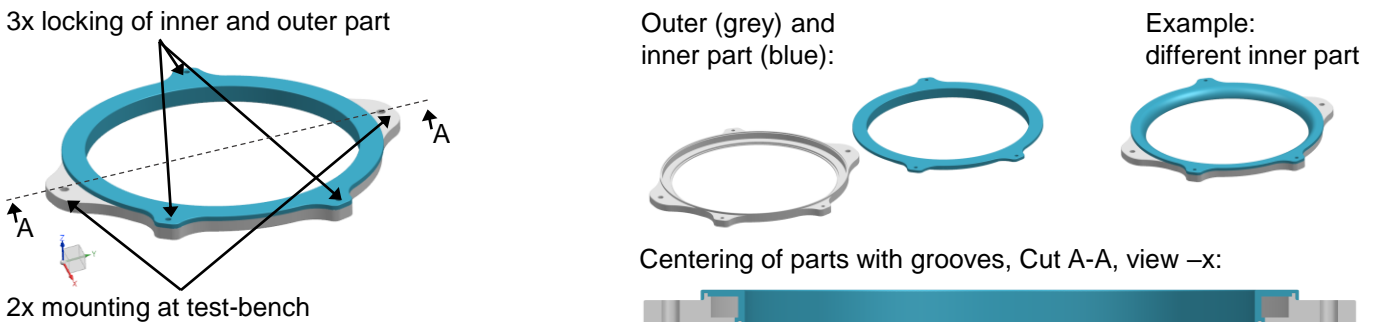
Duct concept: Outer and variable inner part including mounting positions at the test bench and locking of parts with screws and grooves.
